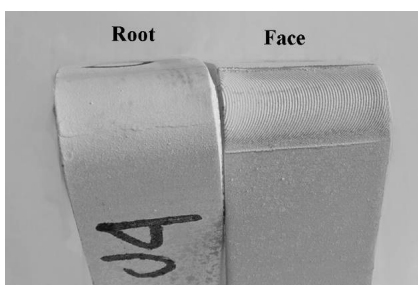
A typical bend test sample (fillet + cavity tool) showing no cracks for root and face. The penetrant dye was used to support this test.
